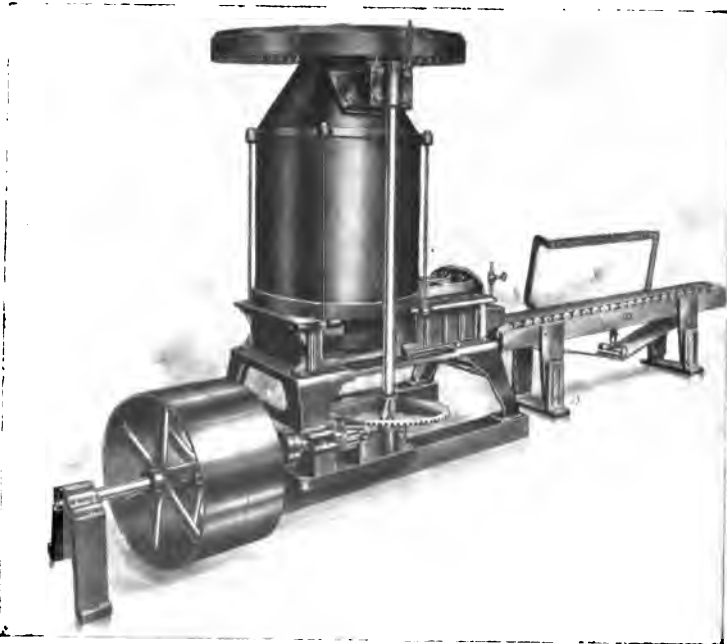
Plunger Type of Brick Machine with Wire-cutting Table.
